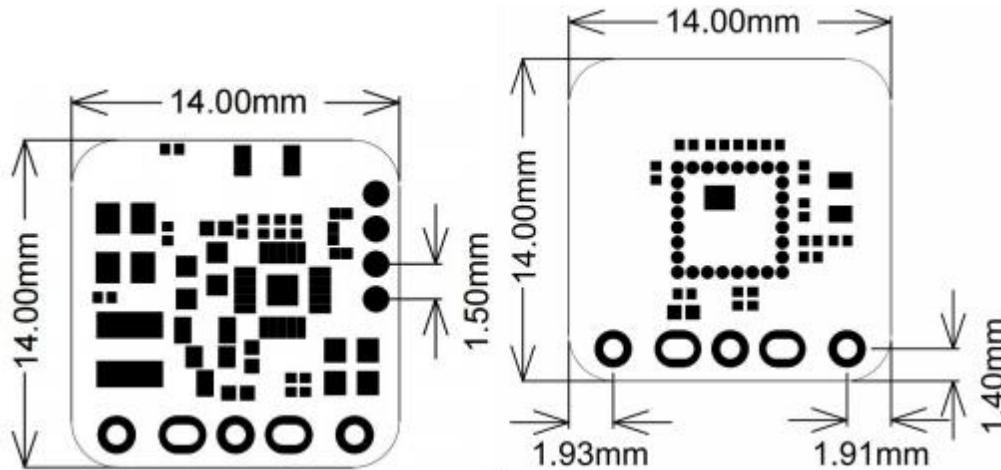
HLK-LD2416 hardware mechanical dimension
